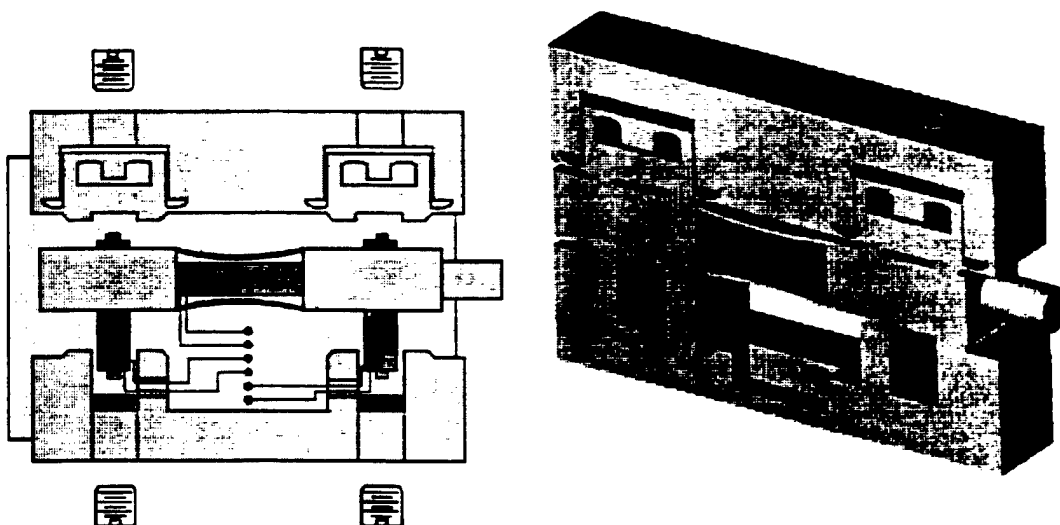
a) Assembly layout of the inchworm actuator and b) Rendered solid model of the final design of the H3C Inchworm Actuator
